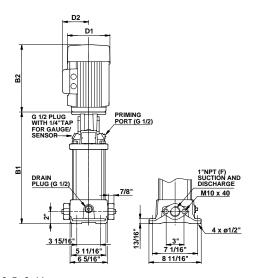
Dimensional sketch of CRF 3-5, 3-11
